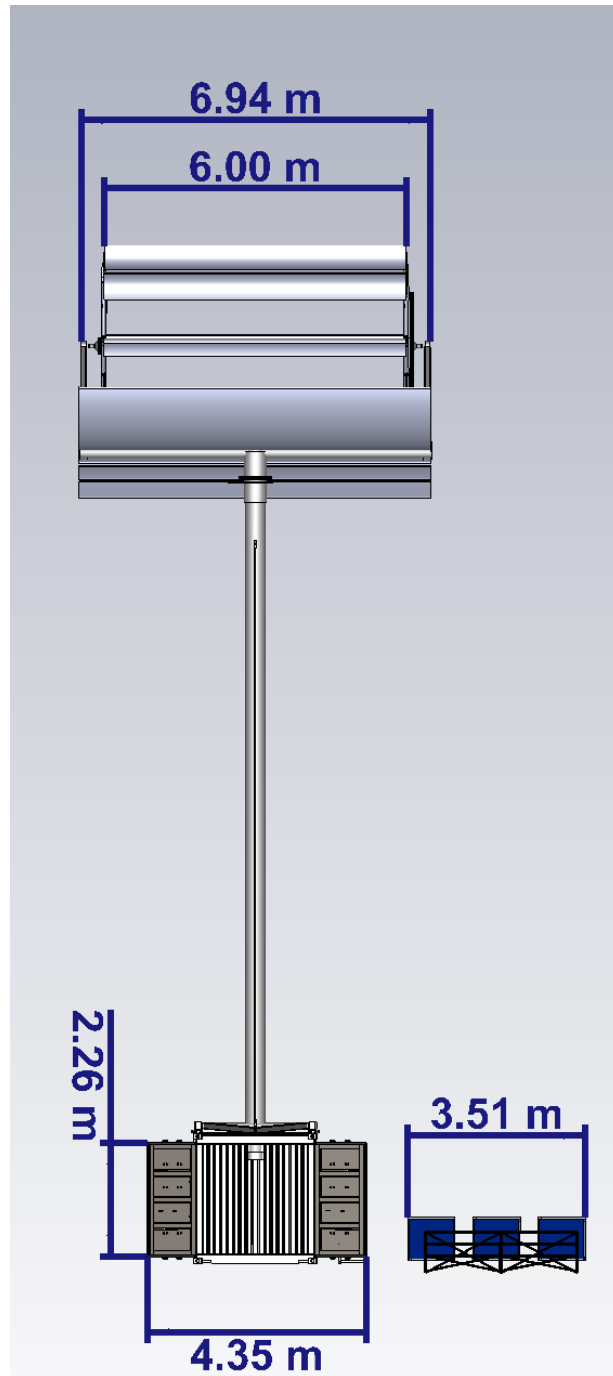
The front view of a Crossflow wind turbine installation CAD model
